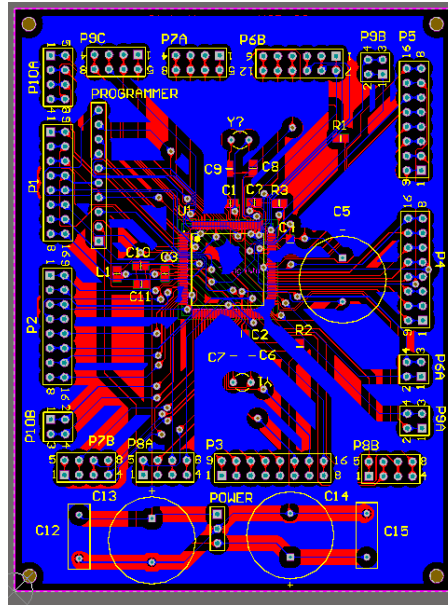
Bottom Layer of Robot MSP432 PCB
